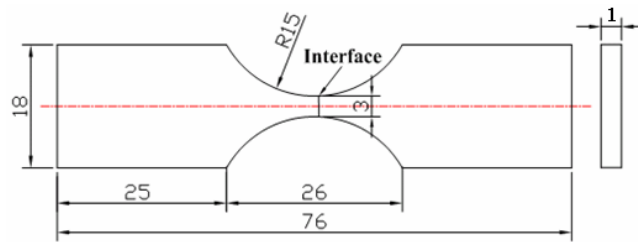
Shape and dimensions of the microscopic tensile specimen (mm)
